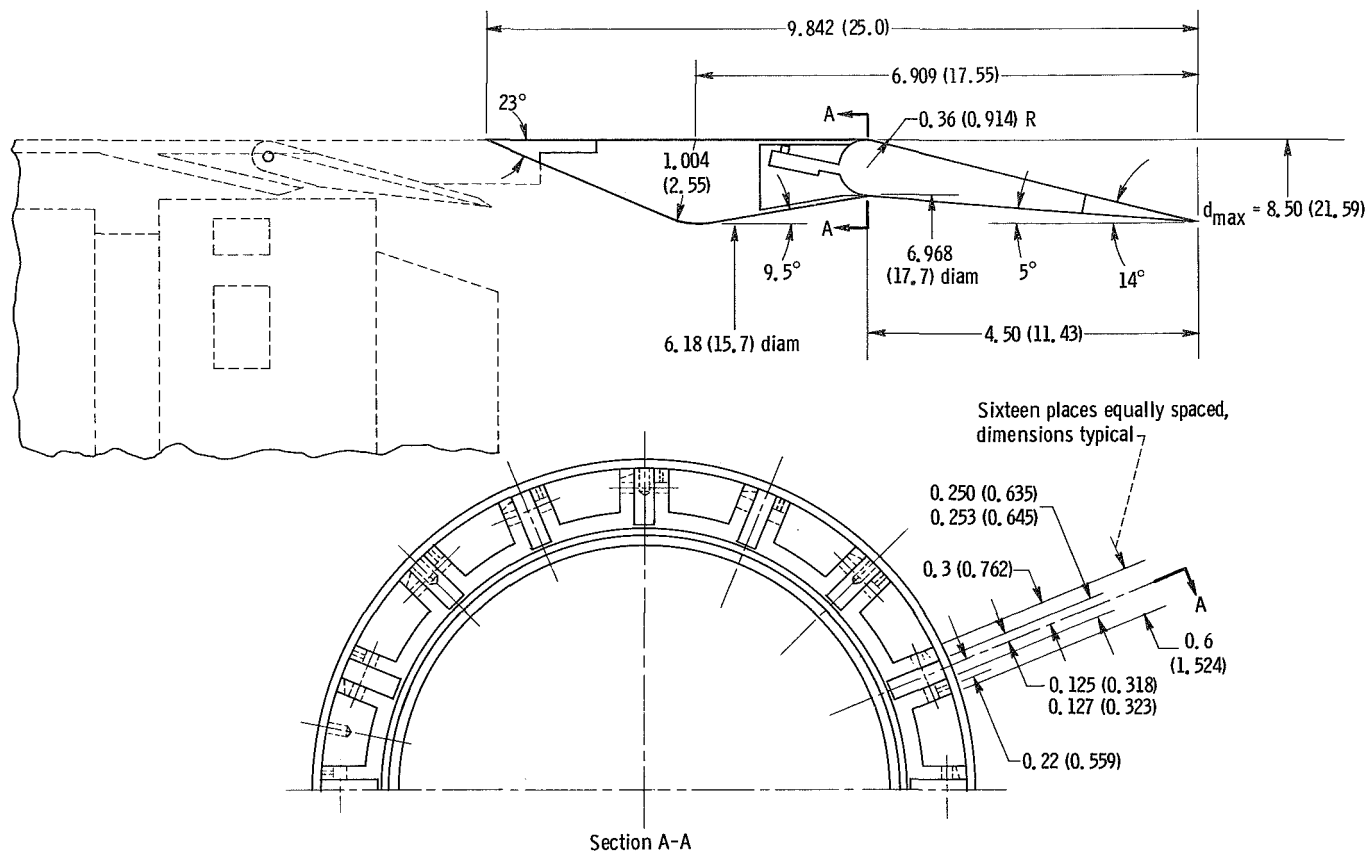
Details of single-hinge trailing-edge flap. (Dimensions are in inches (cm).)
